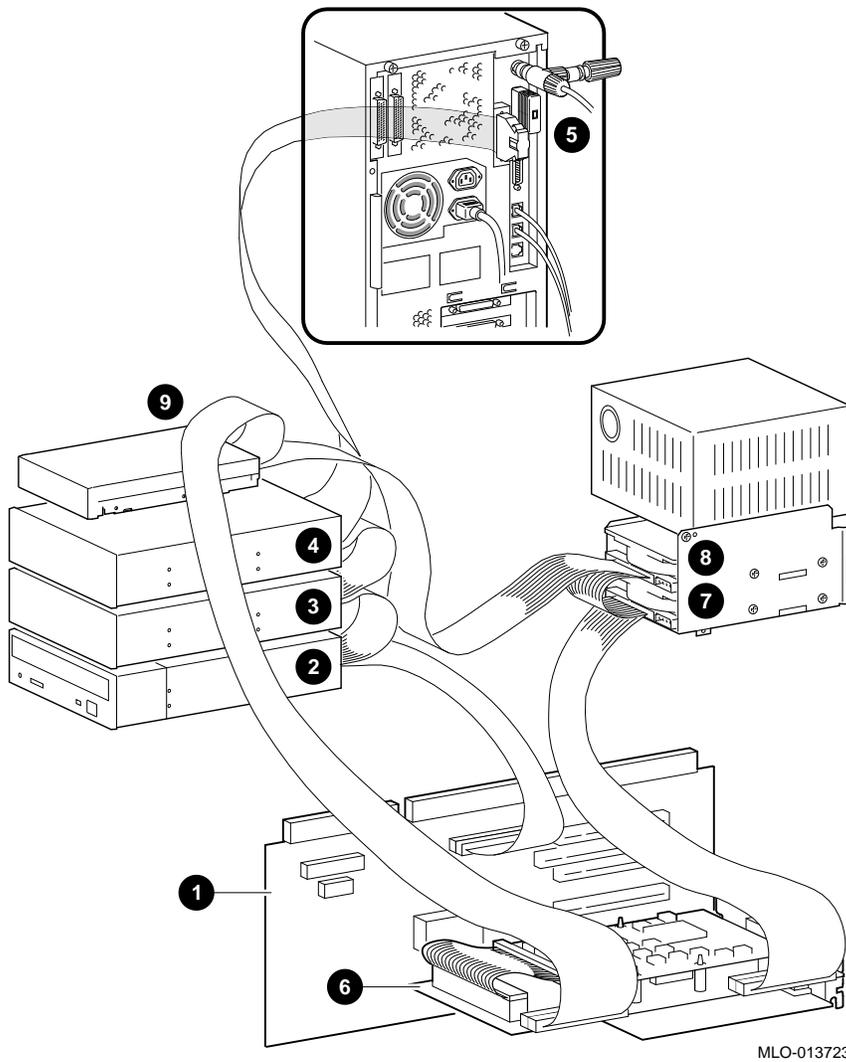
SCSI Cable Routing with Optional Removable Media Devices
